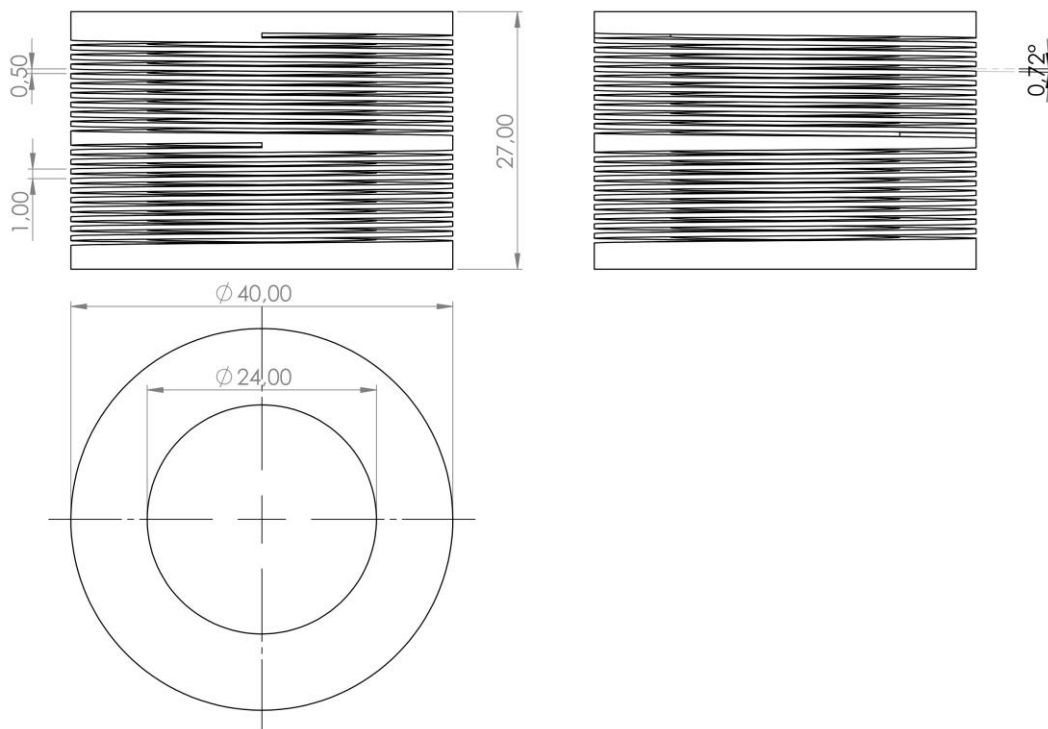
Dimensioned CAD of the Helical-B spring model. Two counter-rotating spirals of 10.5 coils each, 1 mm pitch, 0.5 mm carving. External diameter of 40 mm and radial thickness of 8 mm
